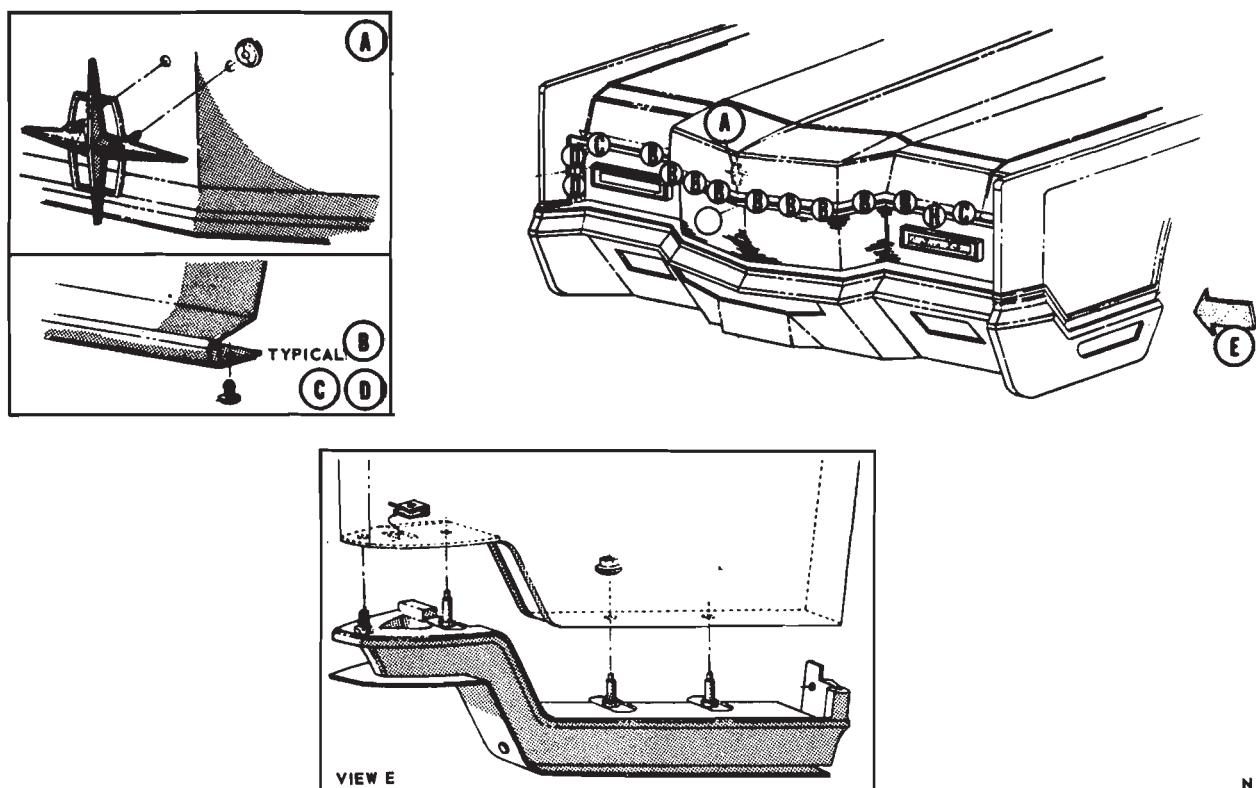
Lincoln Continental Exterior Front Moulding Installation
